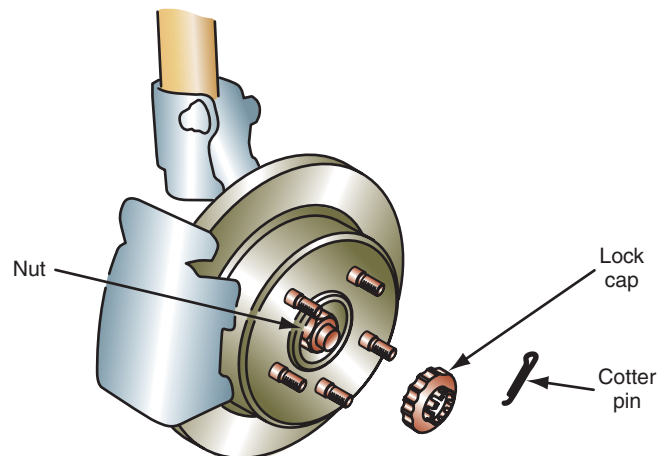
Removing the drive axle cotter pin, lock, cap, and nut.
